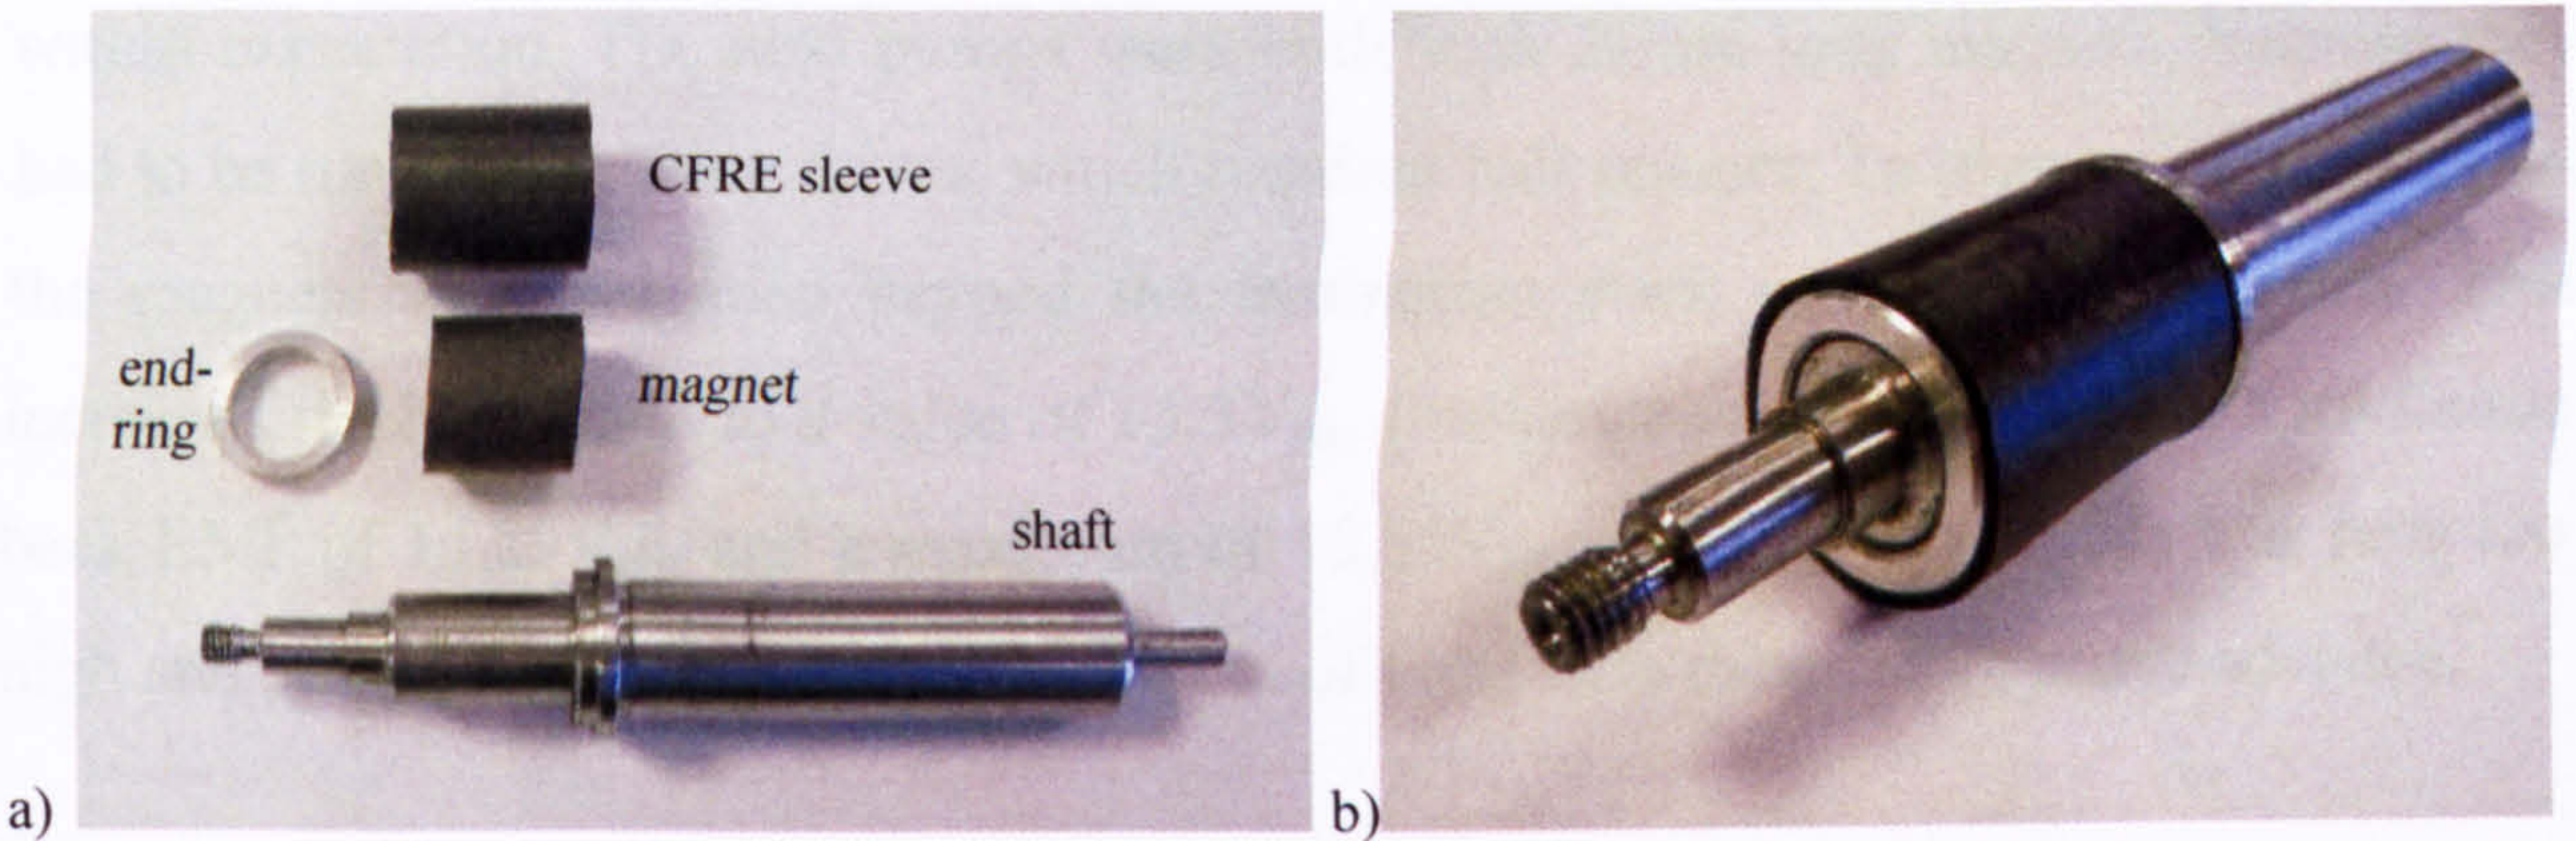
Photos of the 6-tooth, 4-pole motor rotor: a) individual parts, b) assembled shaft
